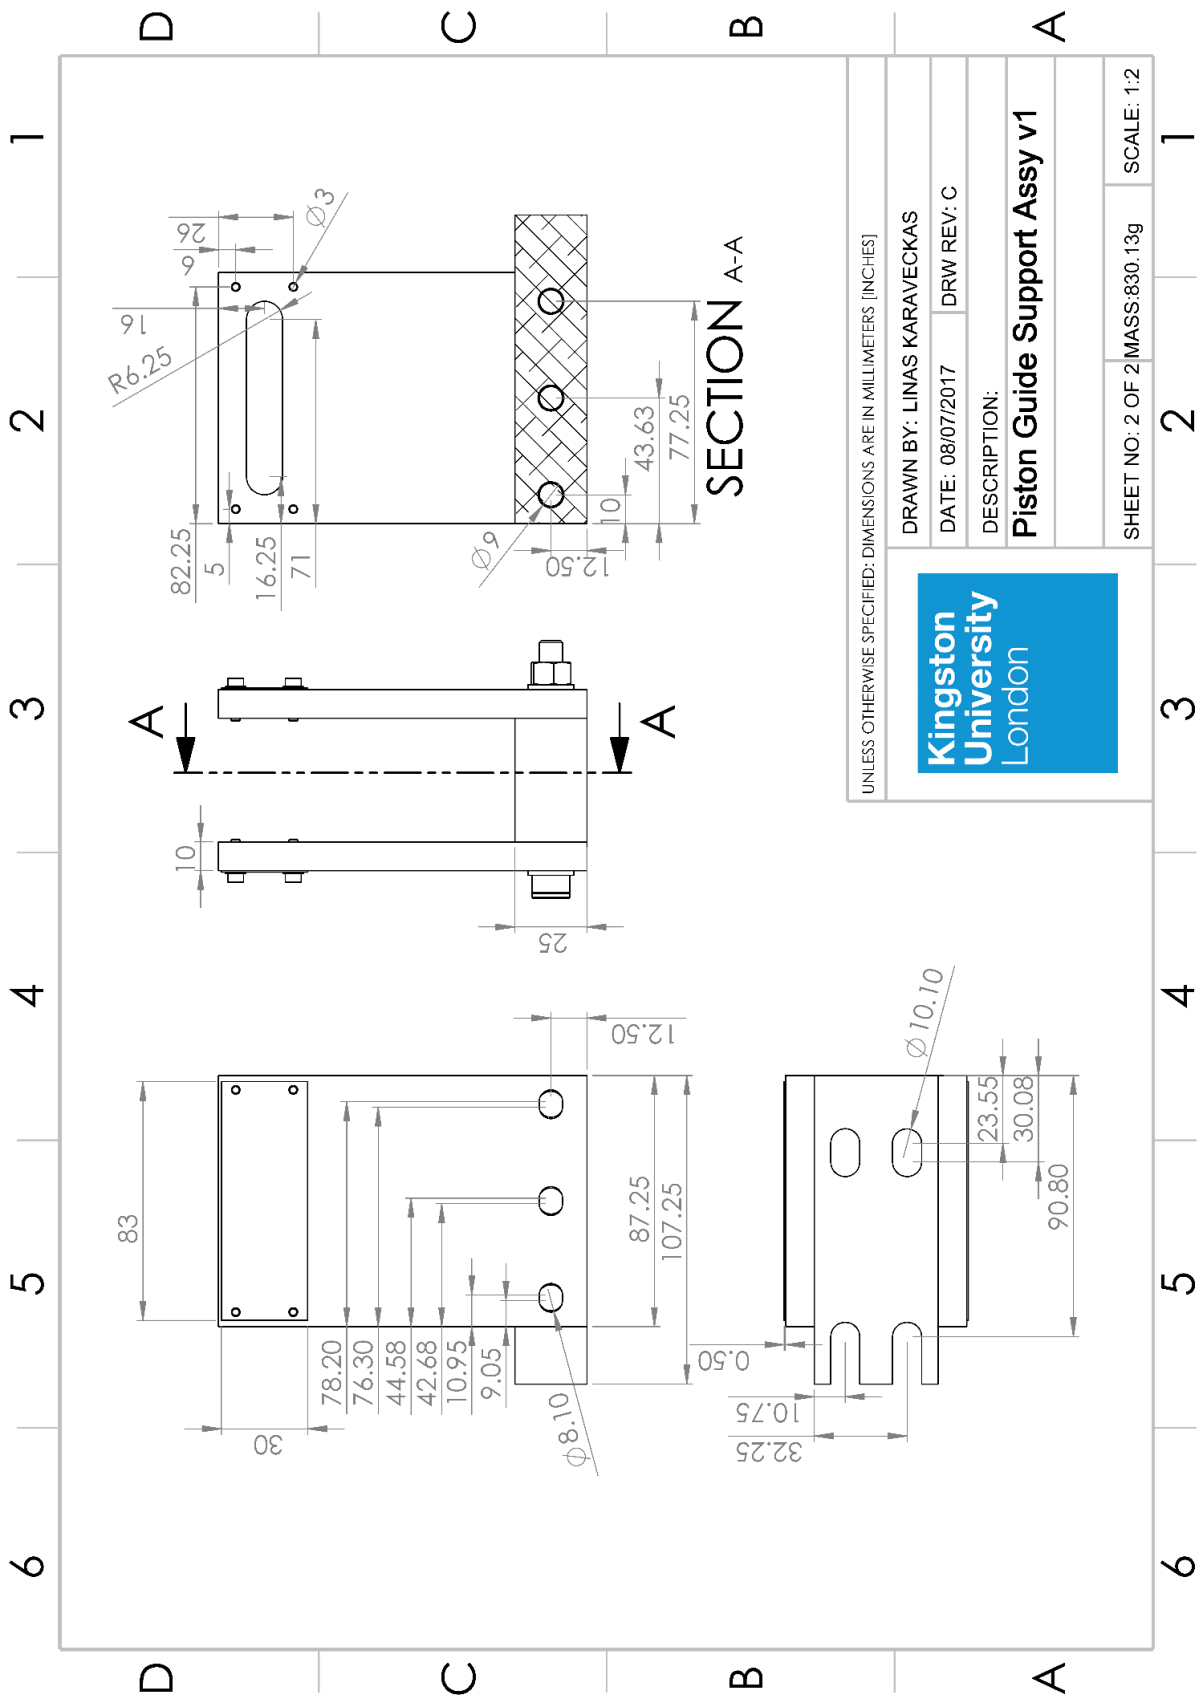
Mark II Piston Guide Support Assembly Drawing, Pg.2
